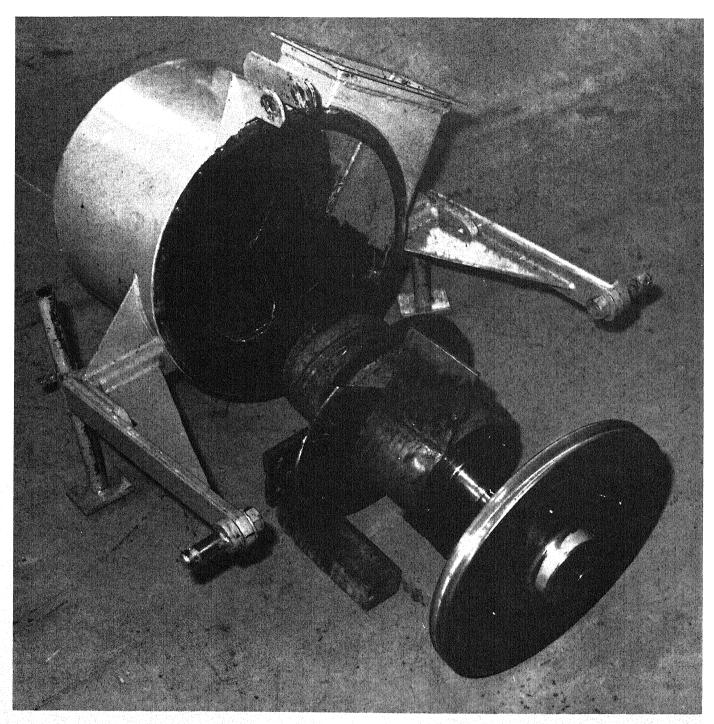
Portable spiral-head chunking machine disassembled. F-531824
